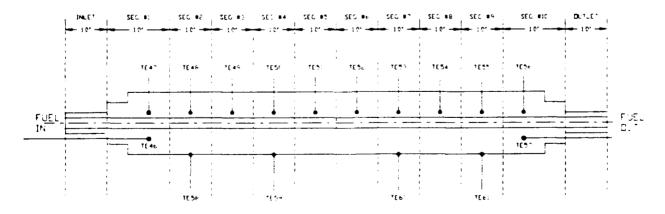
BFA Thermocouple Placement and Cutting Guide
